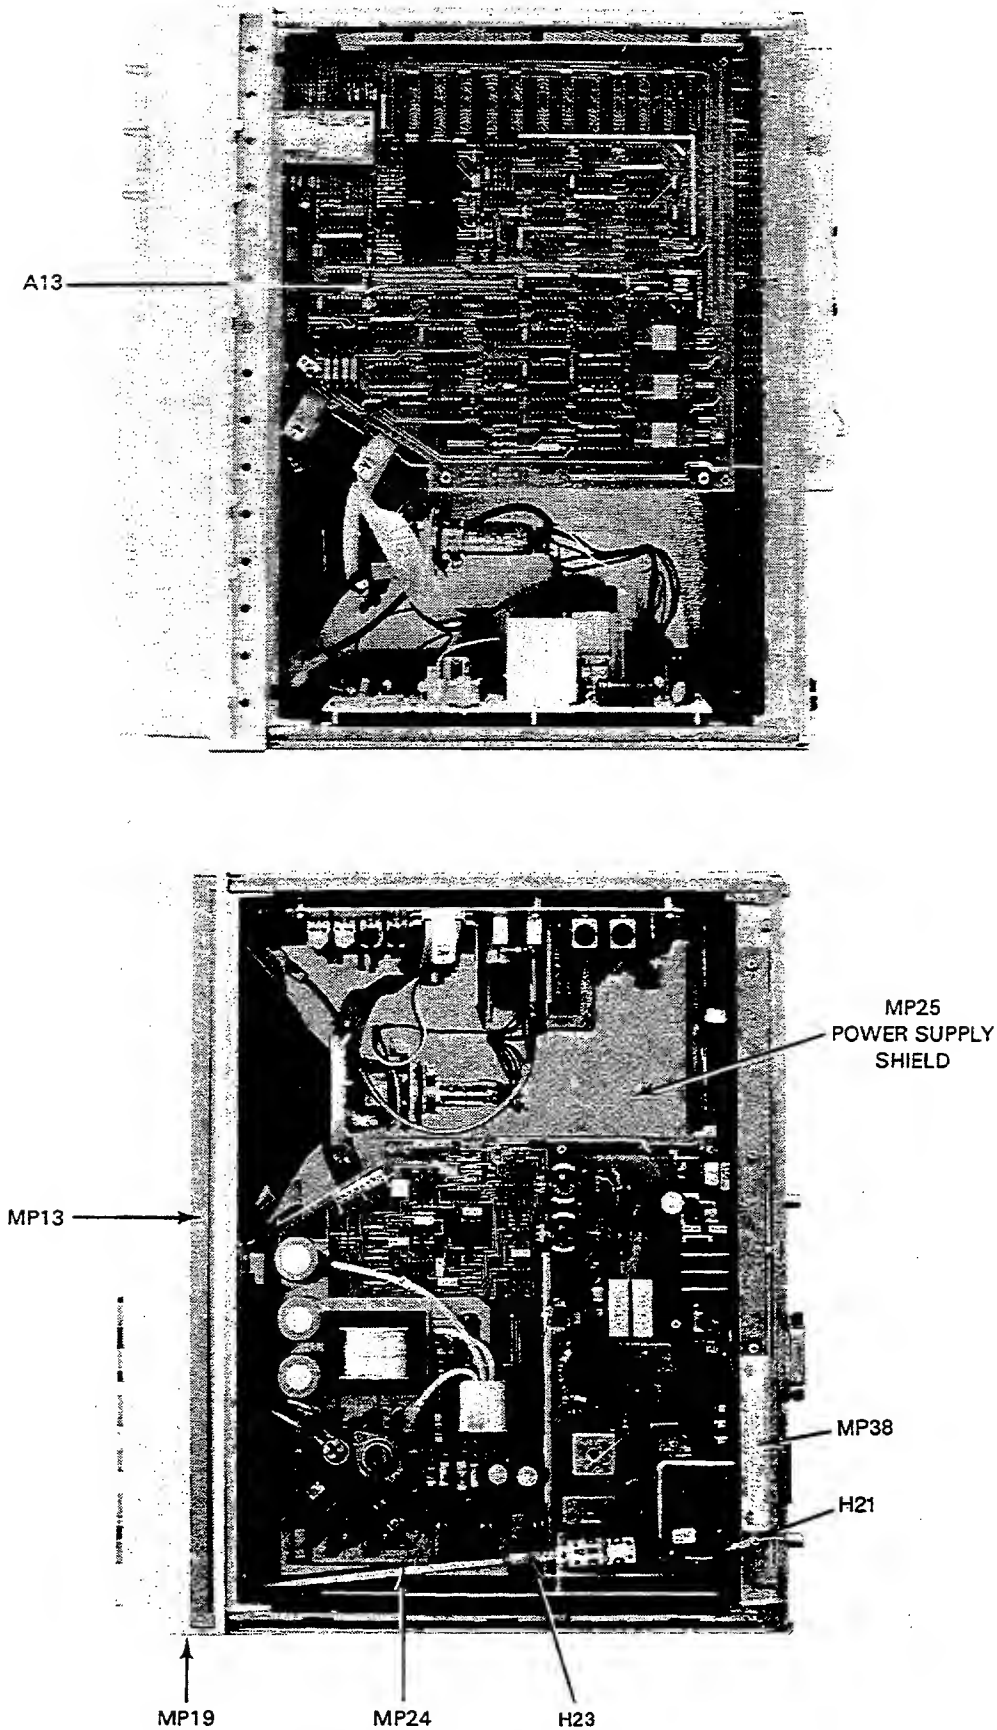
Mainframe Mechanical Parts Locations (sheet 3 of 4)
